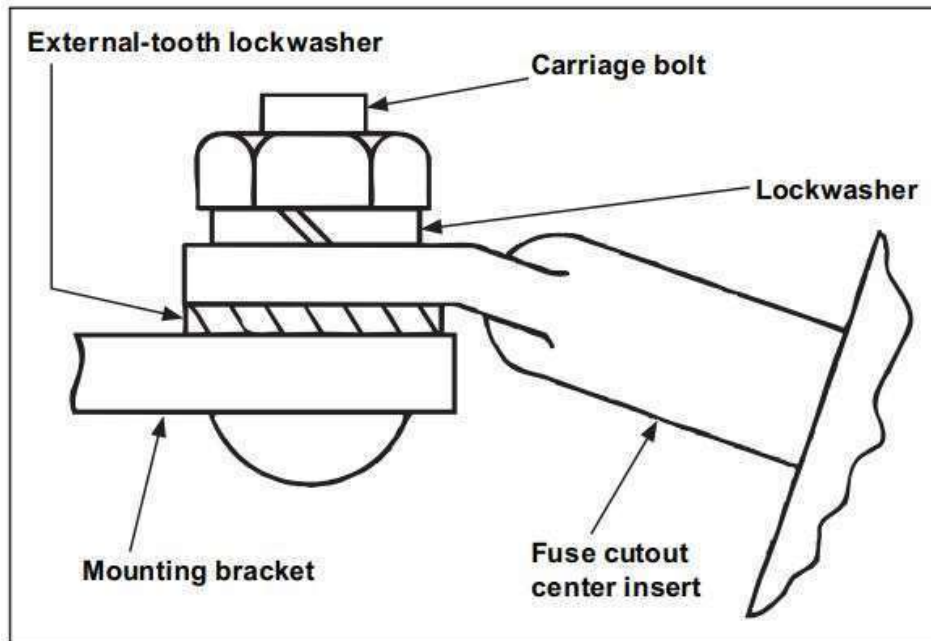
Detail of attachment of fuse cutout to mounting bracket.
